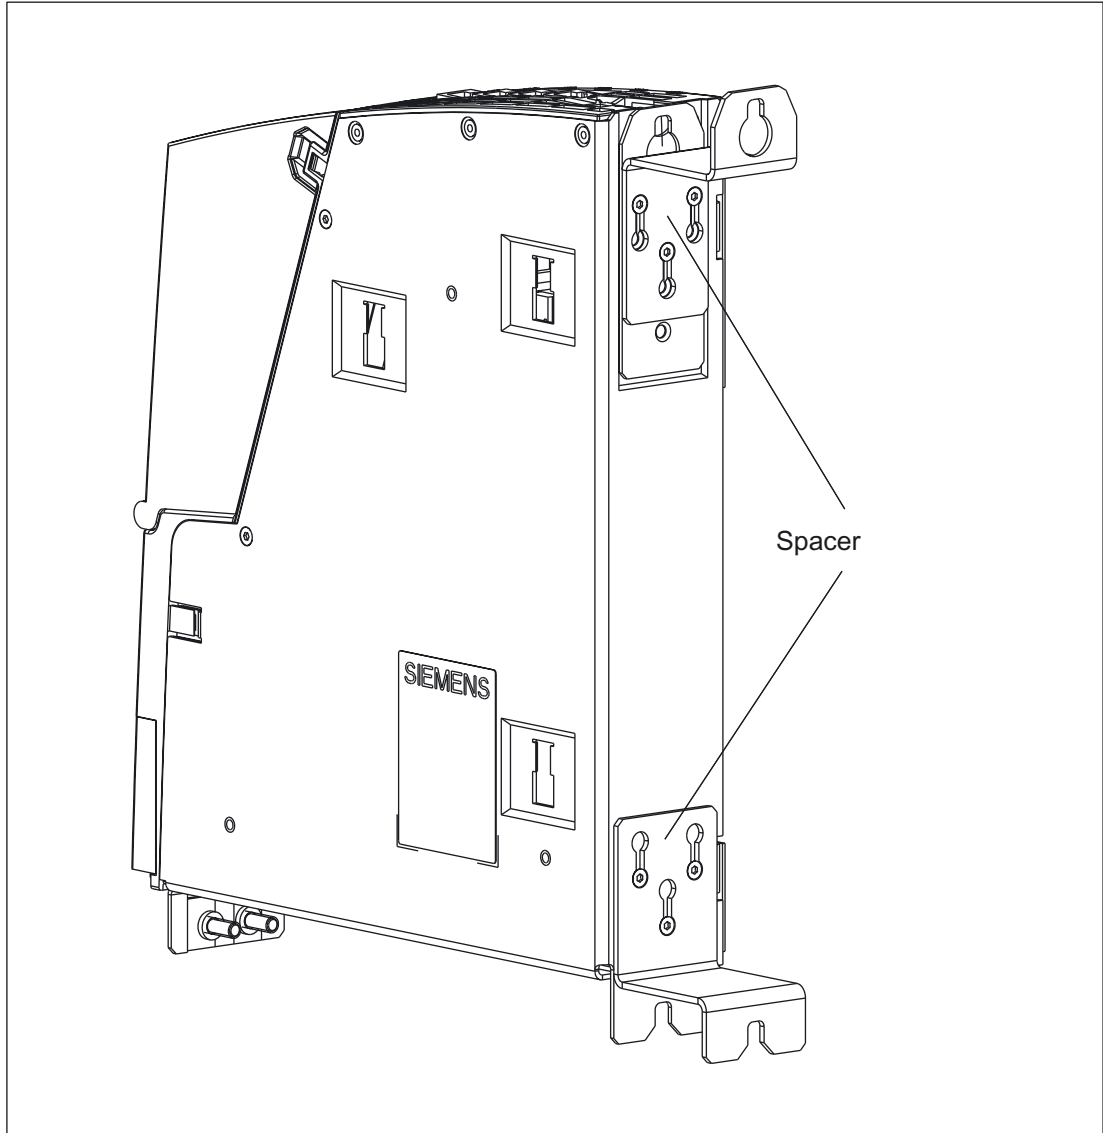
Installing the CU320 on a mounting surface using spacer elements
